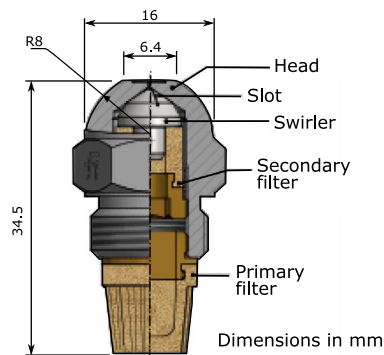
Pressure-swirl atomizer, main components and dimensions.
